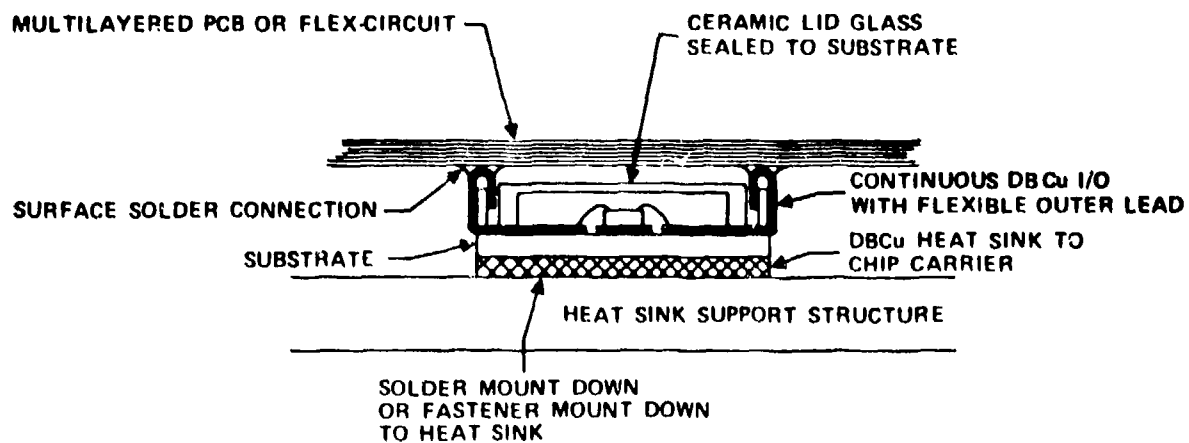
Surface Mounted DB Cu Hermetic Chip Carrier (HCC)
